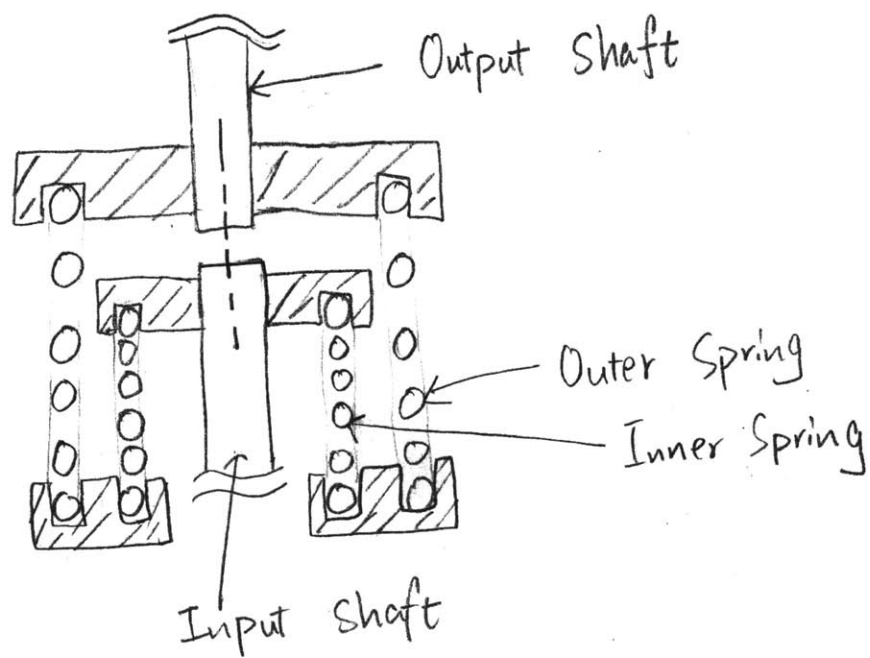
Spring packaging design concept 3: springs with different diameters packaged concentrically. This design reduces the the axial length without changing the direction of motion.
